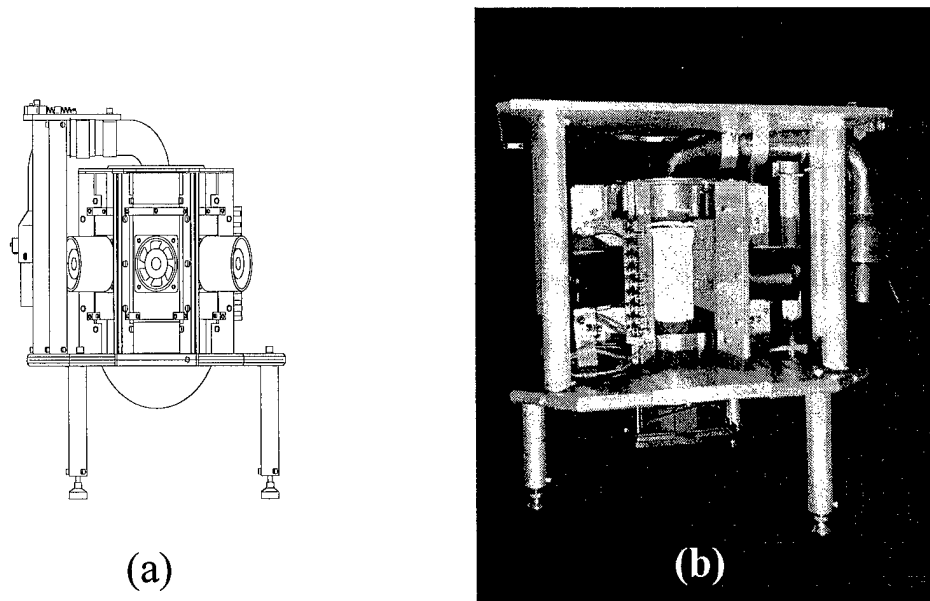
The prototype TPV generator (a) conceptual drawing, and (b) final assembly.
